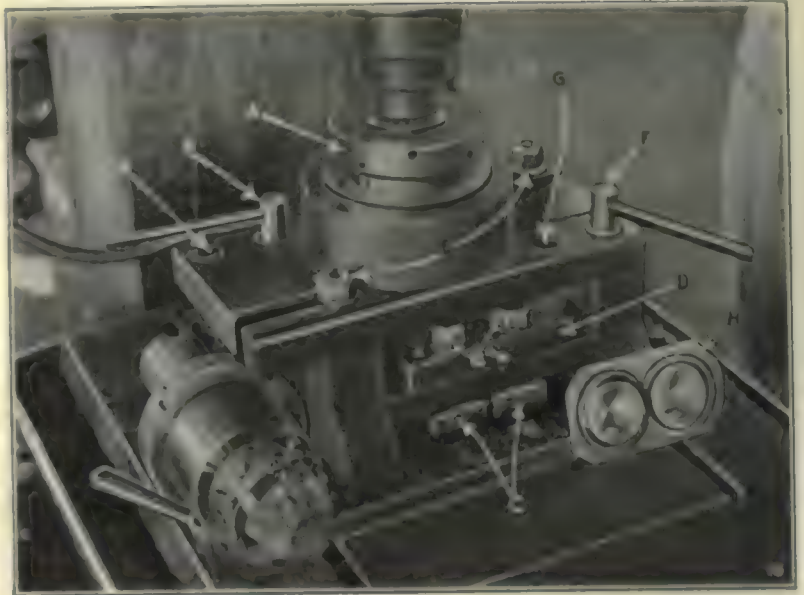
MILLING THE PISTON CLEARANCE. FIG. 16—JIG FOR BORING JOURNAL BEARING CASE COVERS
